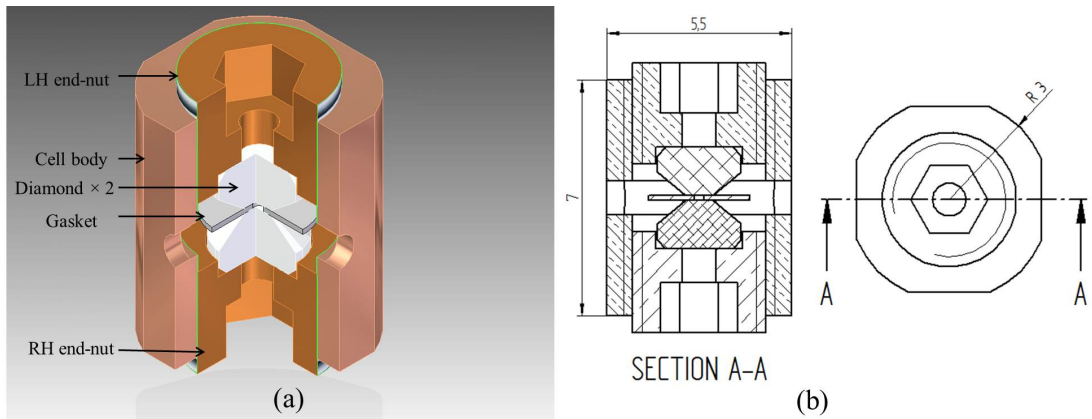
(a) Quarter-section view of TM-3He-DAC; (b) the CAD drawing with main dimensions
